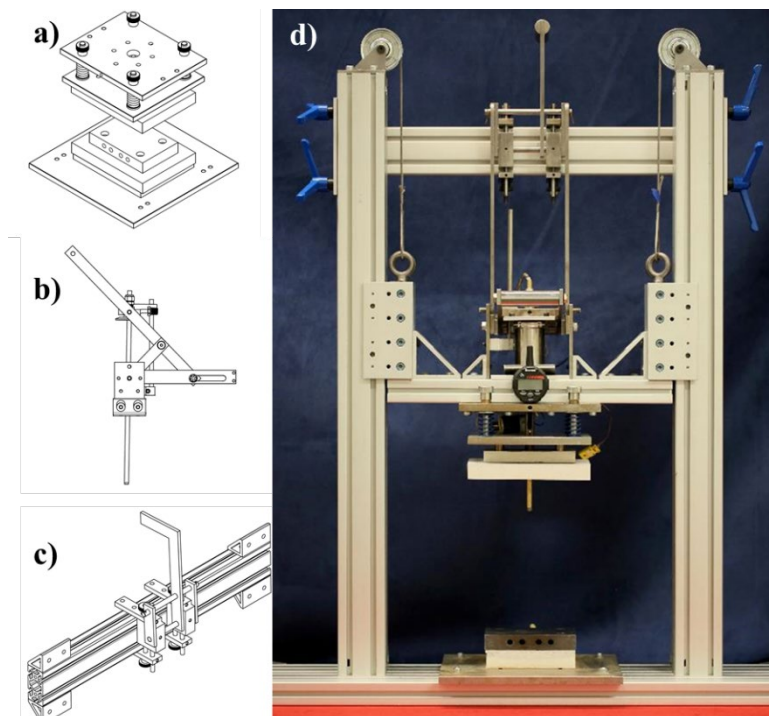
a) hotplates, b) poking mechanism, c) lever mechanism for the setup d) picture of the stretch blow molding equipment.
